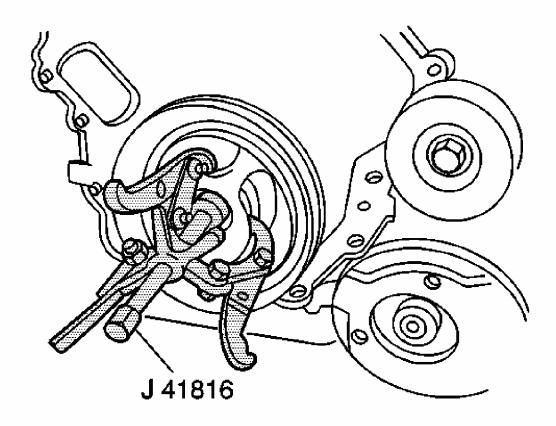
View of J 41816 Removing Crankshaft Balancer Courtesy of GENERAL MOTORS CORP.
